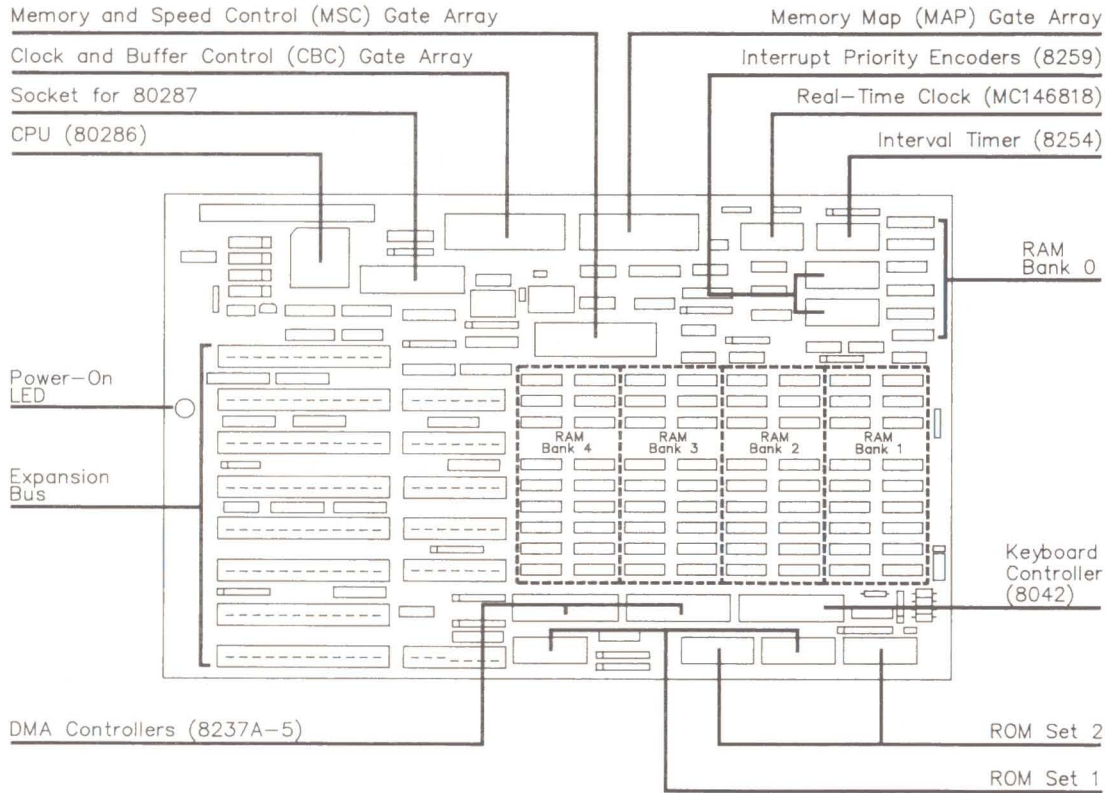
The 12 MHz Version COMPAQ DESKPRO 286 System Board Component Layout
